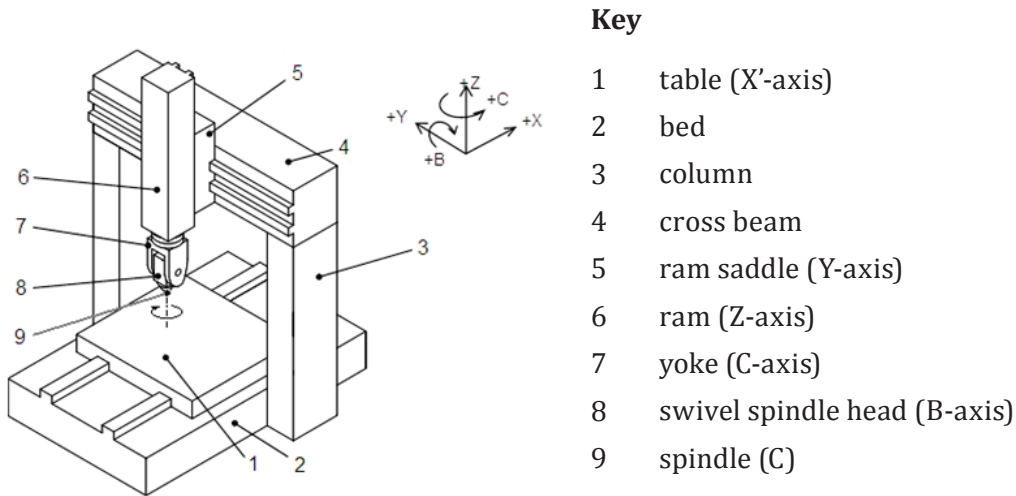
Example of geometrical representation of a vertical five-axis machining centre [w X' b Y Z C B (C) t]
